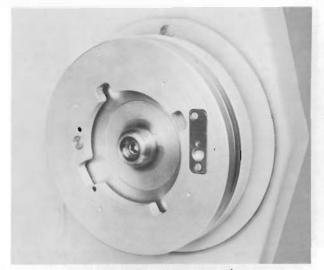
Right-hand Bearing of Scanning Drum with Clamping Device for Small Scanning Drum
